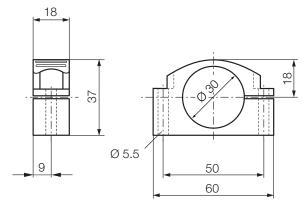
Mounting cuff BTL6-A-MF03-K-50
